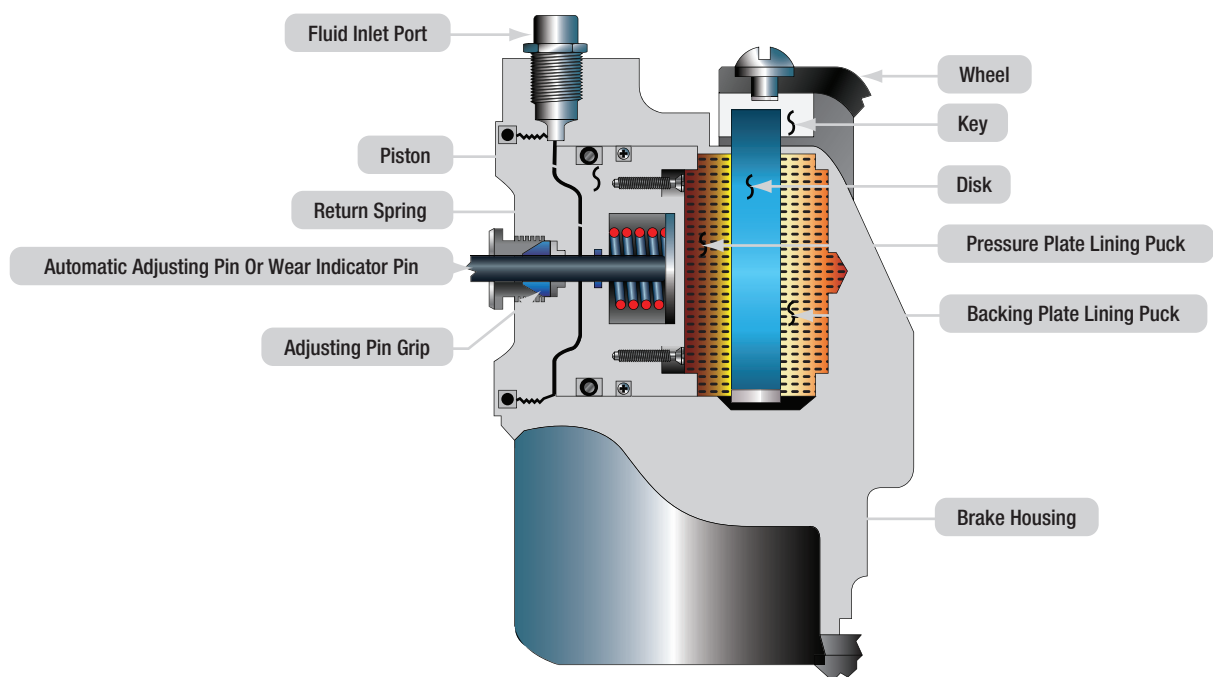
A cross-sectional view of a Goodyear single-disc brake caliper illustrates the adjusting pin assembly that doubles as a wear indicator.
